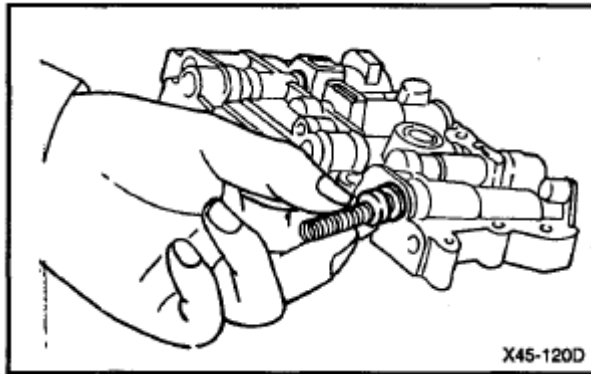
Removing/Installing 1-2 Shift Spring & 1-2 Shift Valve
